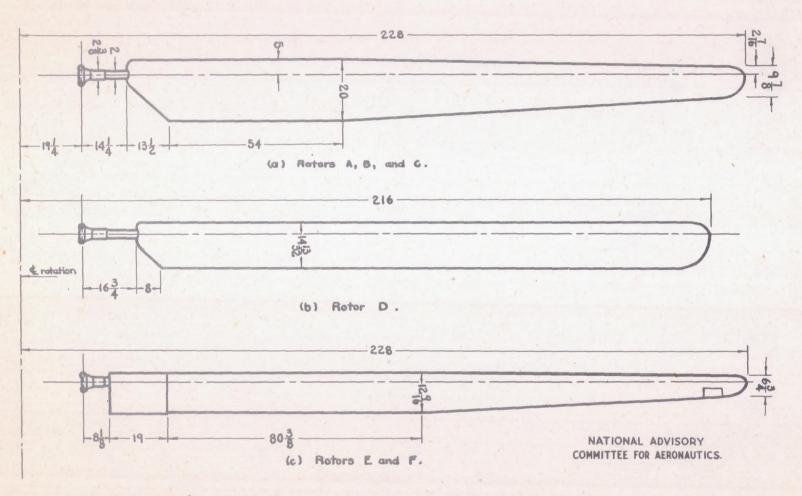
Rotor blades tested in static thrust. (All dimensions given in inches.)
